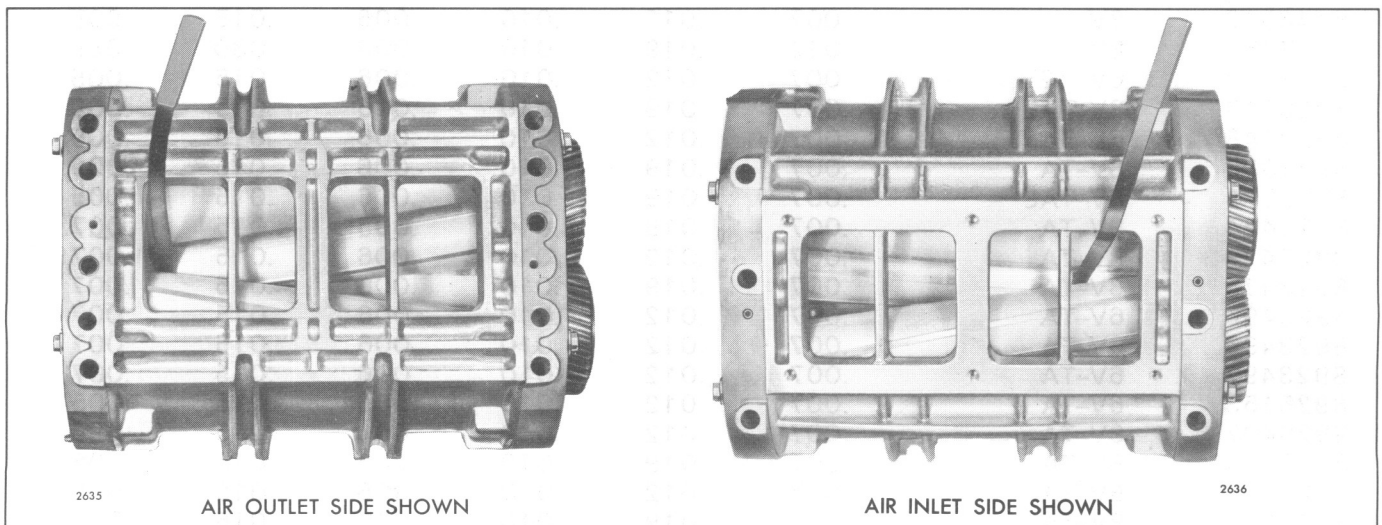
Measuring “CC” and “C” Clearance Between Blower Rotor Lobes
